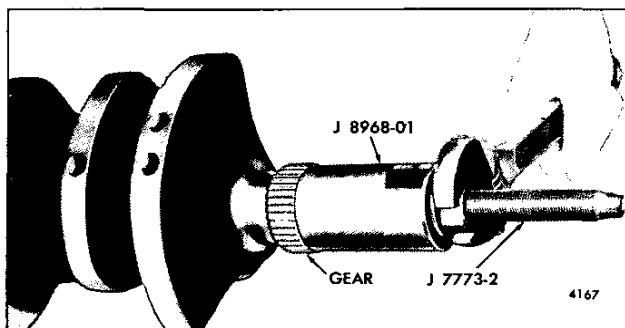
Installing Oil Pump Drive Gear Using Tools J 8968-01 and J 7773-2
